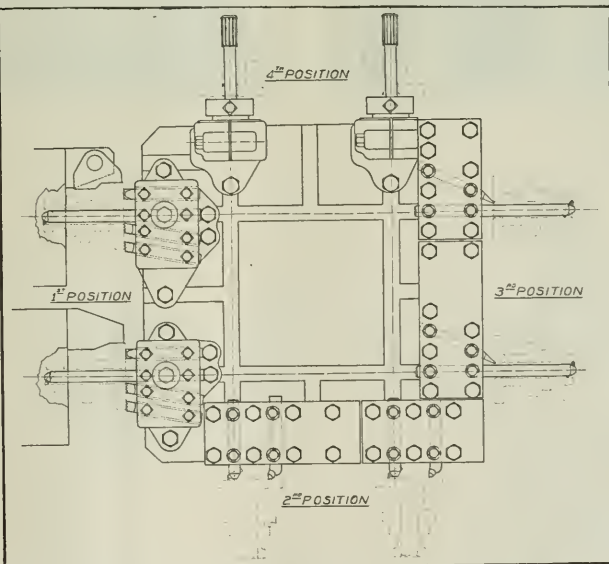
Tooling for machining a Cluster Gear on a Double-spindle Flat Turret Lathe
